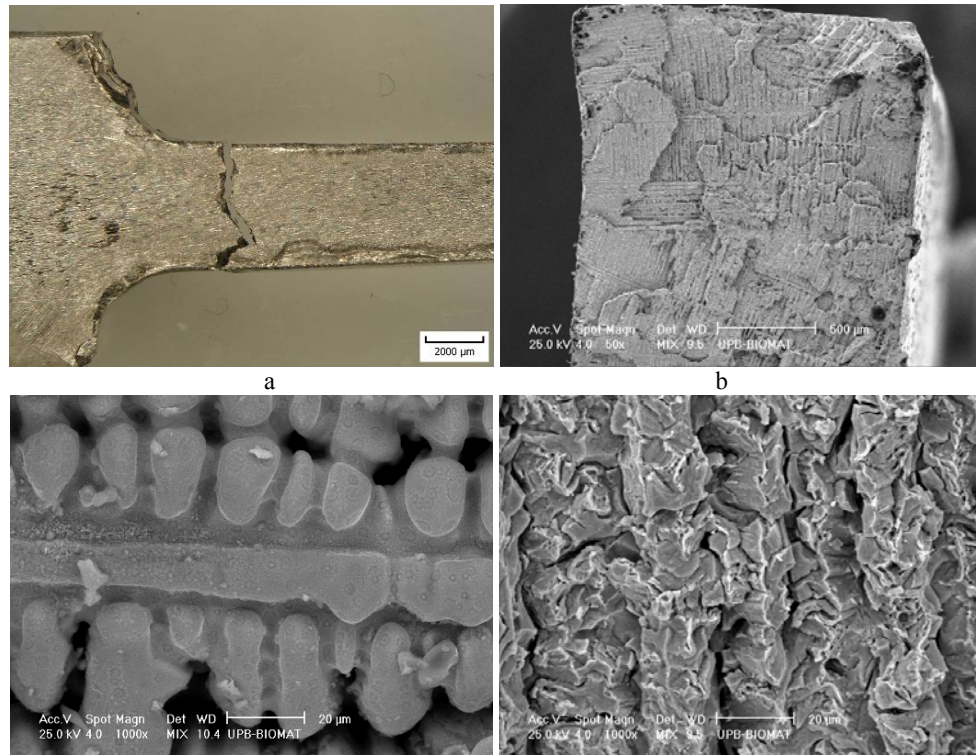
Fractographic images of CoCrMo alloy after tensile test:
